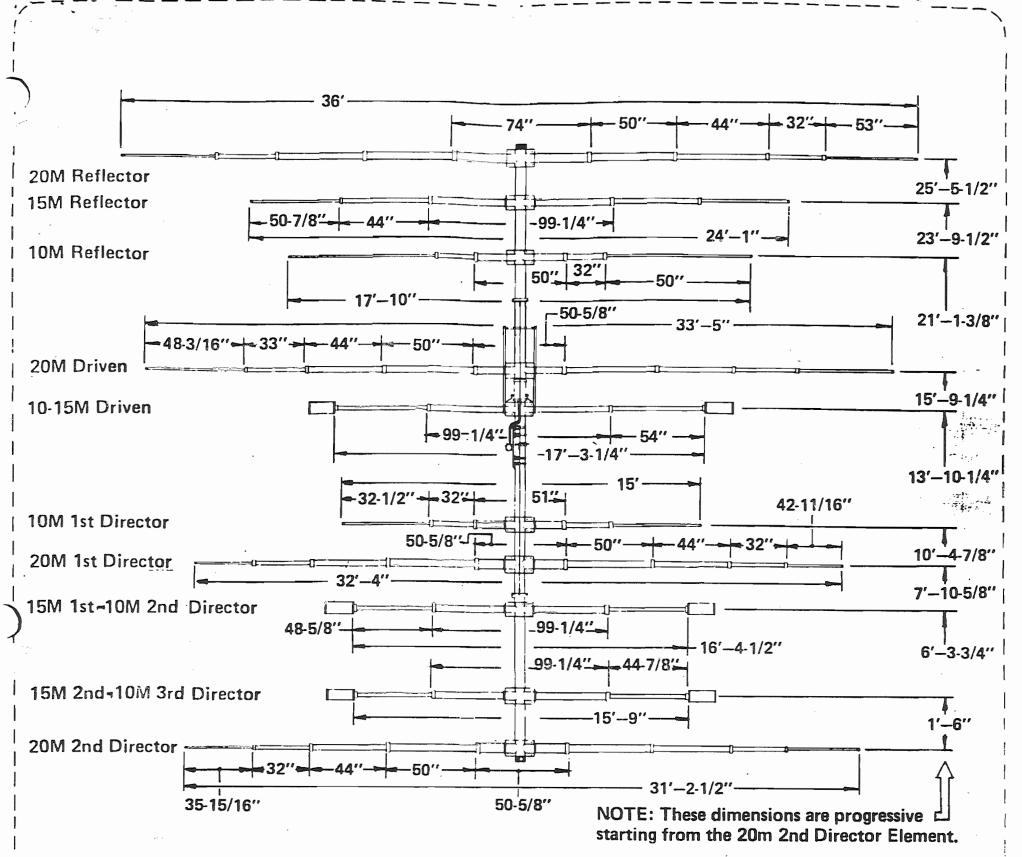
and 4 show a top view of the assembled antenna, and gives part numbers and principal dimensions for assembling and installing the elements. Refer to the parts list for complete descriptions and specifications and to Figures 6 – 8 for specific assembly details and hardware call outs.
